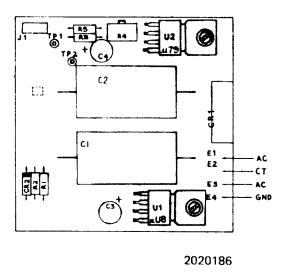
/04/05-4. Oven Oscillator Power Supply (A112) Component Location
